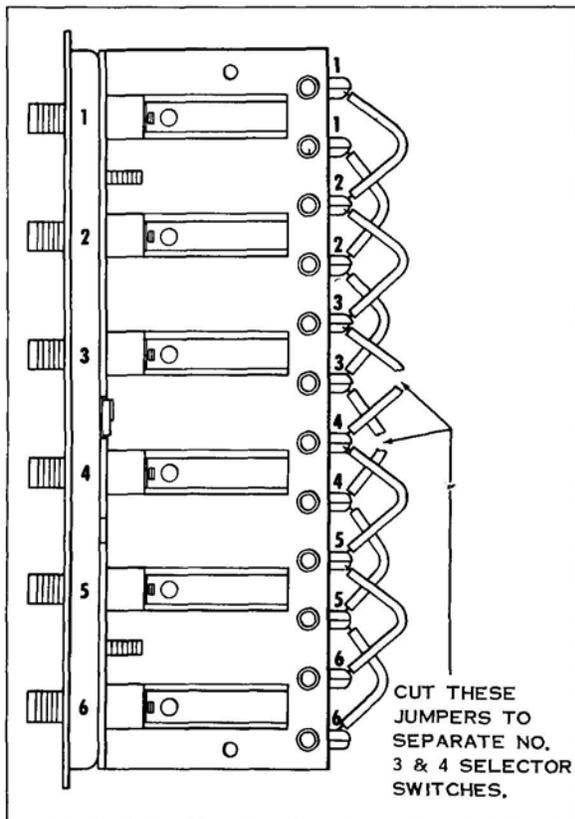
Top View of Switch Panel Showing Looped Jumper Wires
